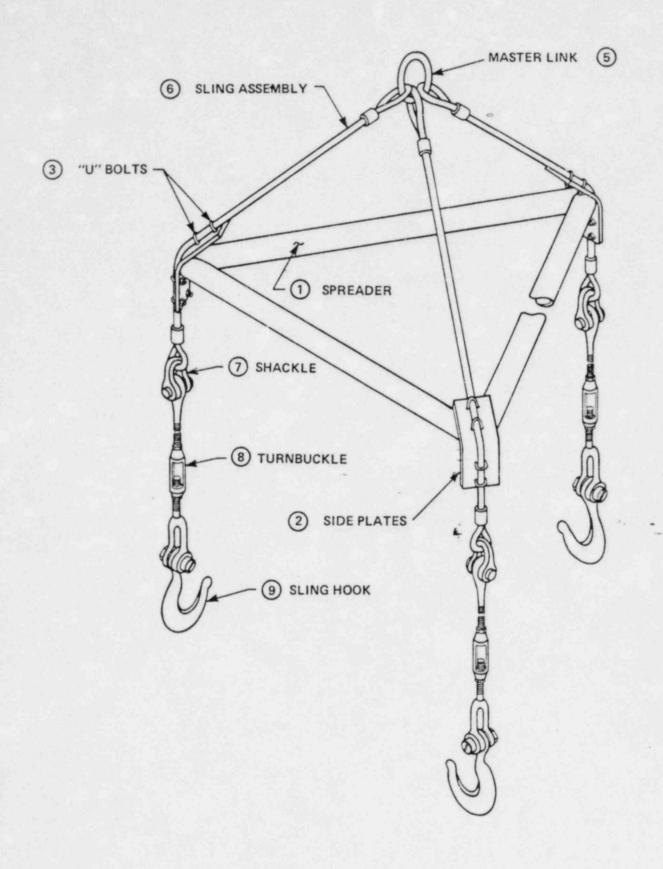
Reactor Coolant Pump Motor Lift Sling
